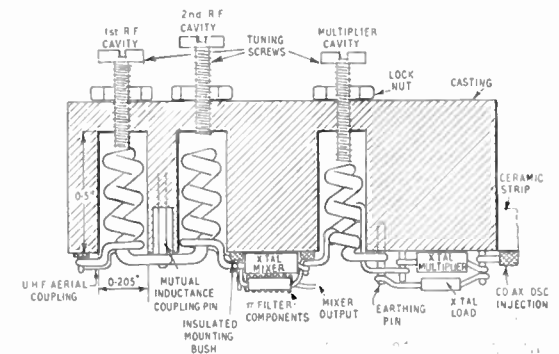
Prototype of a u.h.f. head contained in a machined brass block.
